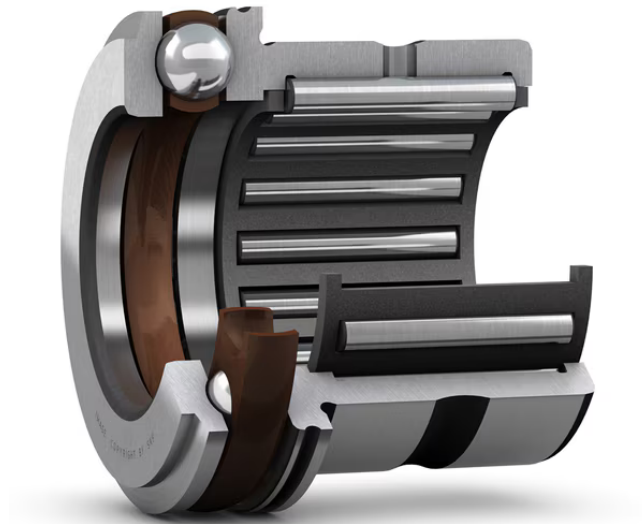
The internals of a Combined needle roller / thrust ball bearing.
